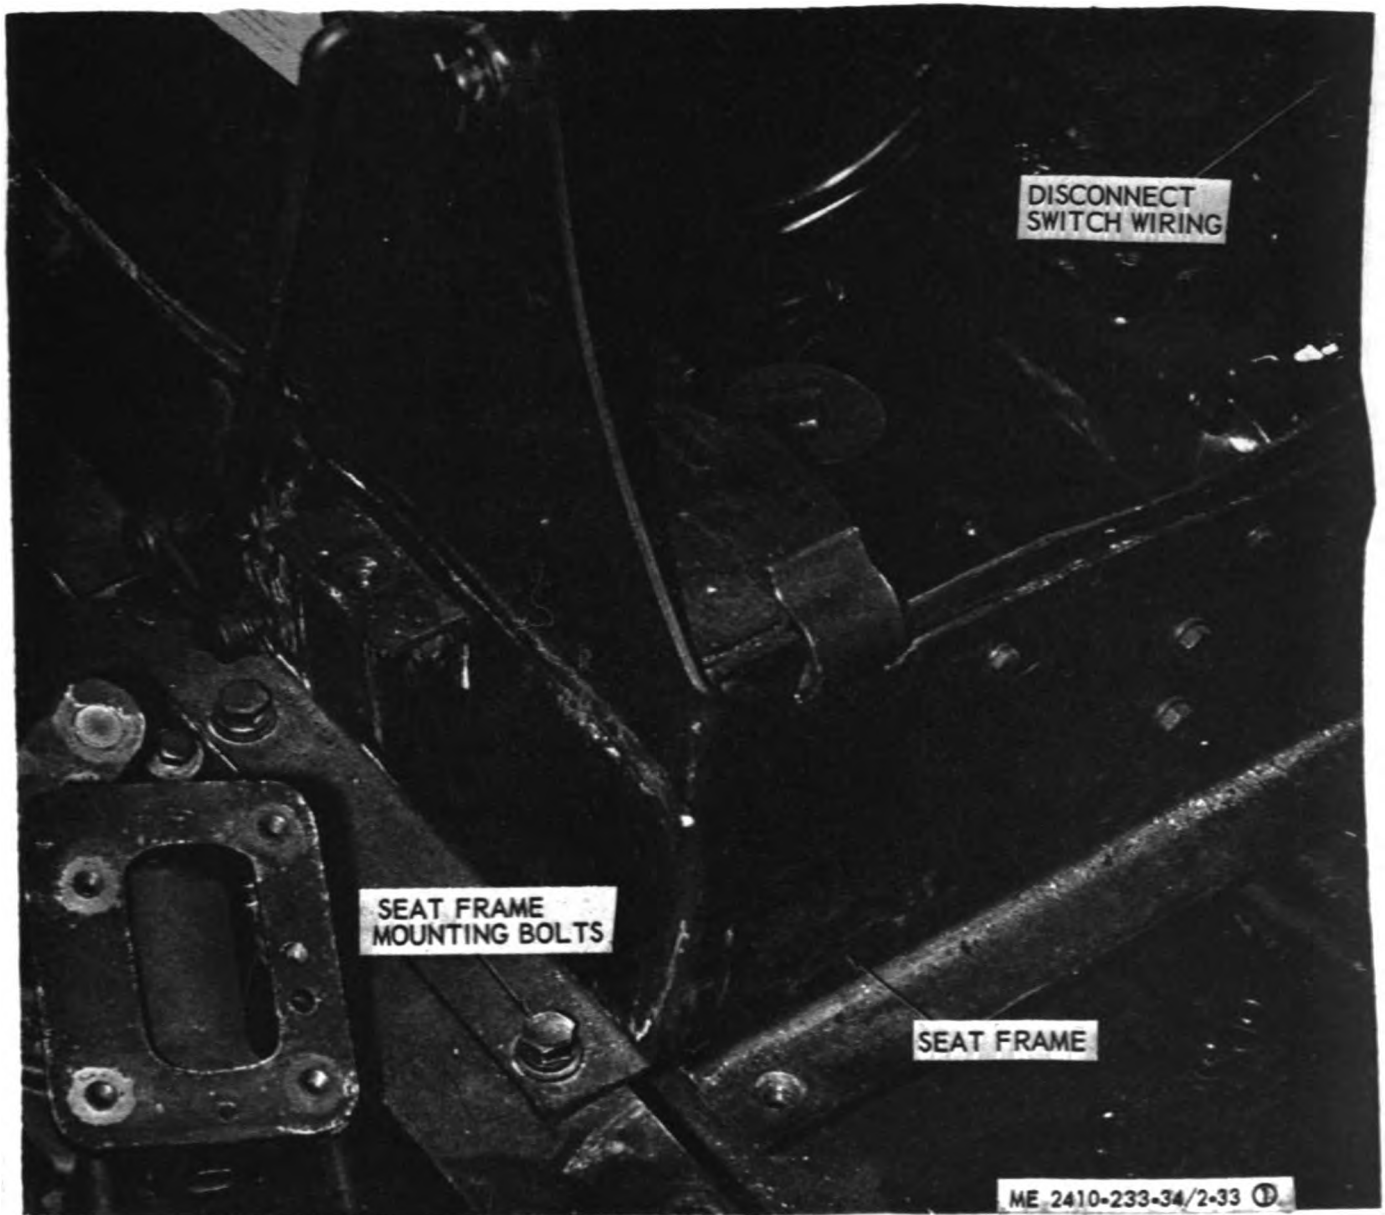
Preparing to remove transmission (sheet 1 of 3).
